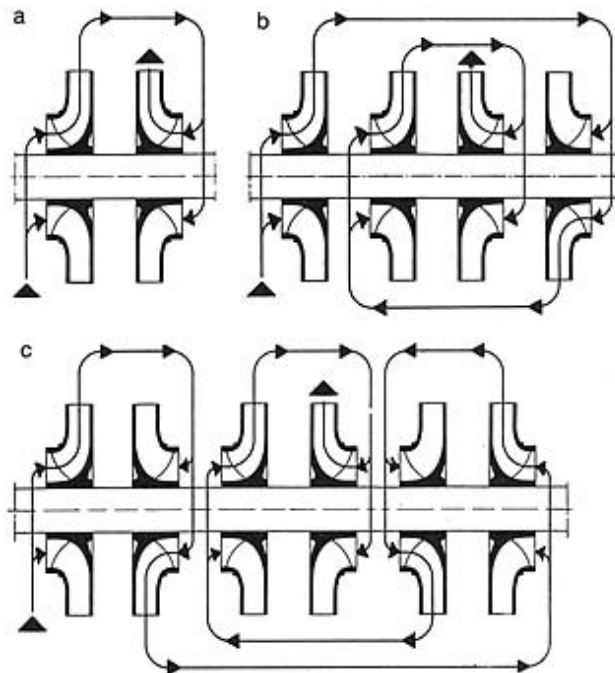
Single suction impeller arrangement, with back-to-back or opposed impellers
